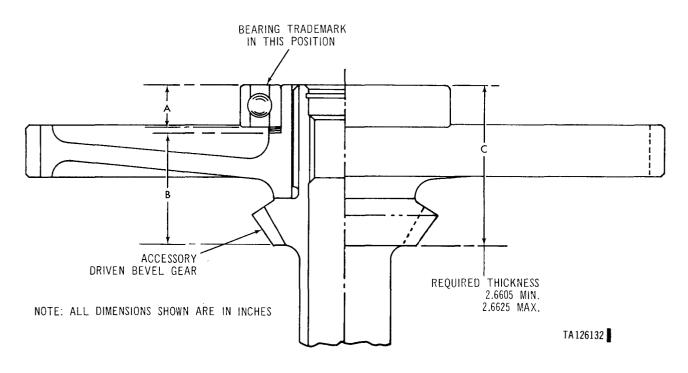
Determining shim thickness for accessory drive bevel gearshaft bearing.
